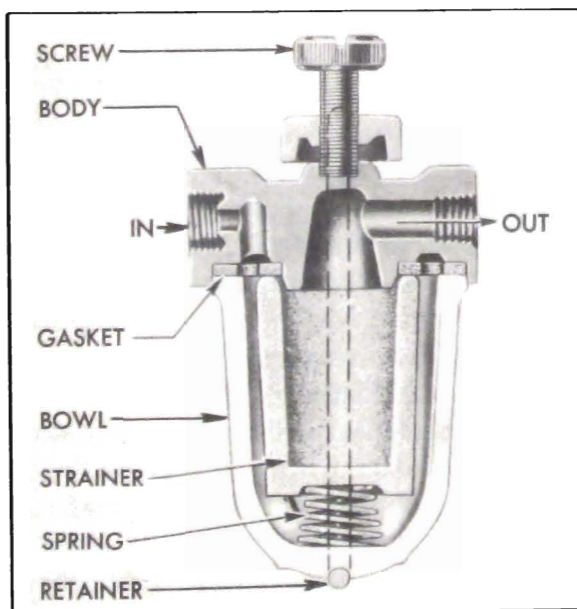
Carter Ceramic Type Gasoline Filter—Sectional View
